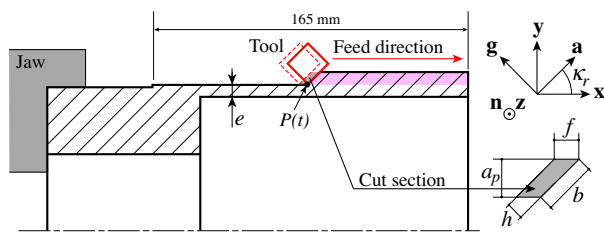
Geometry of the machined tube – Cut section and associated bases
